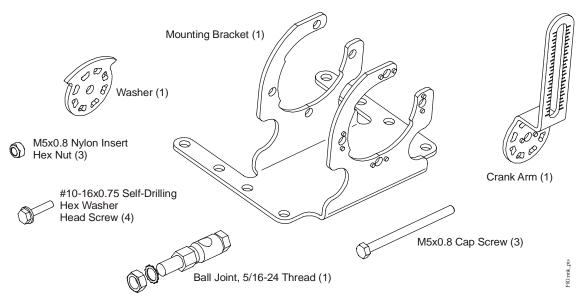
Parts Included in M9208-100 Remote Mounting Kit
